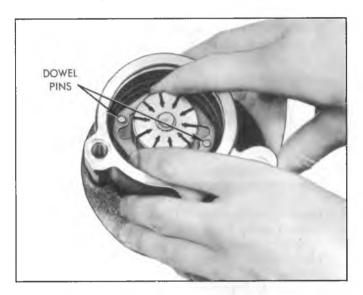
Installing Shaft, Thrust Plate, and Rotor Assembly
